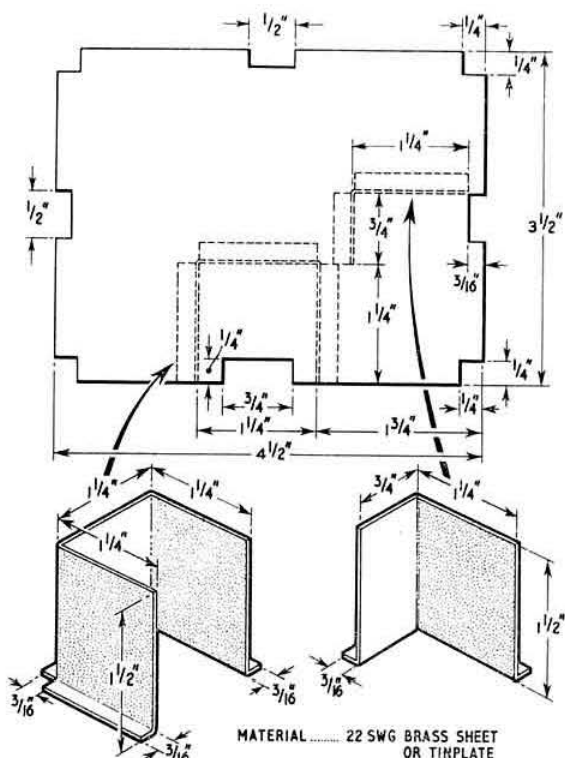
Dimensions of the two screens and the base plate on which are mounted the two perforated paxolin sheets shown in Fig. 3. The i.f. transformer is mounted directly on the base plate inside the U-shaped screen. The r.f. stage is constructed on the smaller sheet and mounted adjacent to the L-shaped screen to the right of the base plate.
